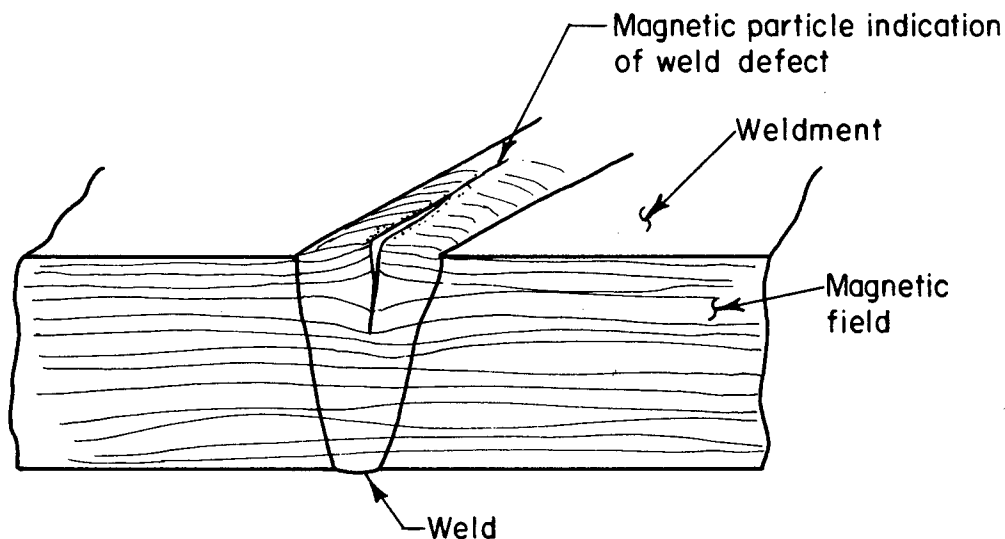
METHOD OF DETECTION OF WELD DEFECTS BY MAGNETIC-PARTICLE INSPECTION
